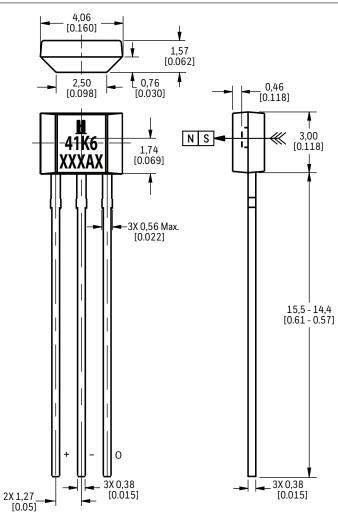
Mounting and Dimensional Drawings (For reference only: mm/[in])
